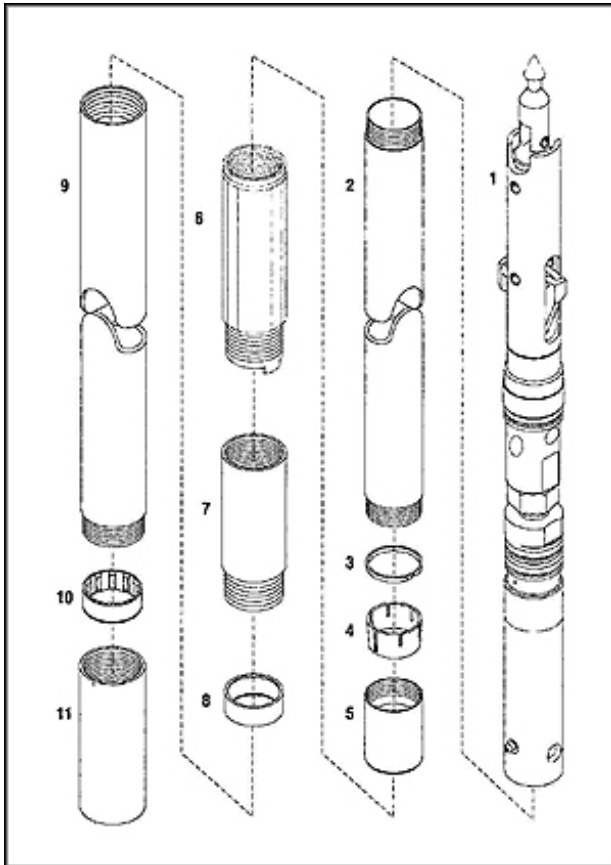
1 – bearing unit; 2 – internal core barrel; 3 – locking ring of core breaker; 4 – core breaker ring; 5 – core-catcher adapter; 6 – special passage; 7 – reducing coupling; 8 – supporting ring; 9 – outside pipe; 10 – stabilizer of internal pipe; 11 – core bit
